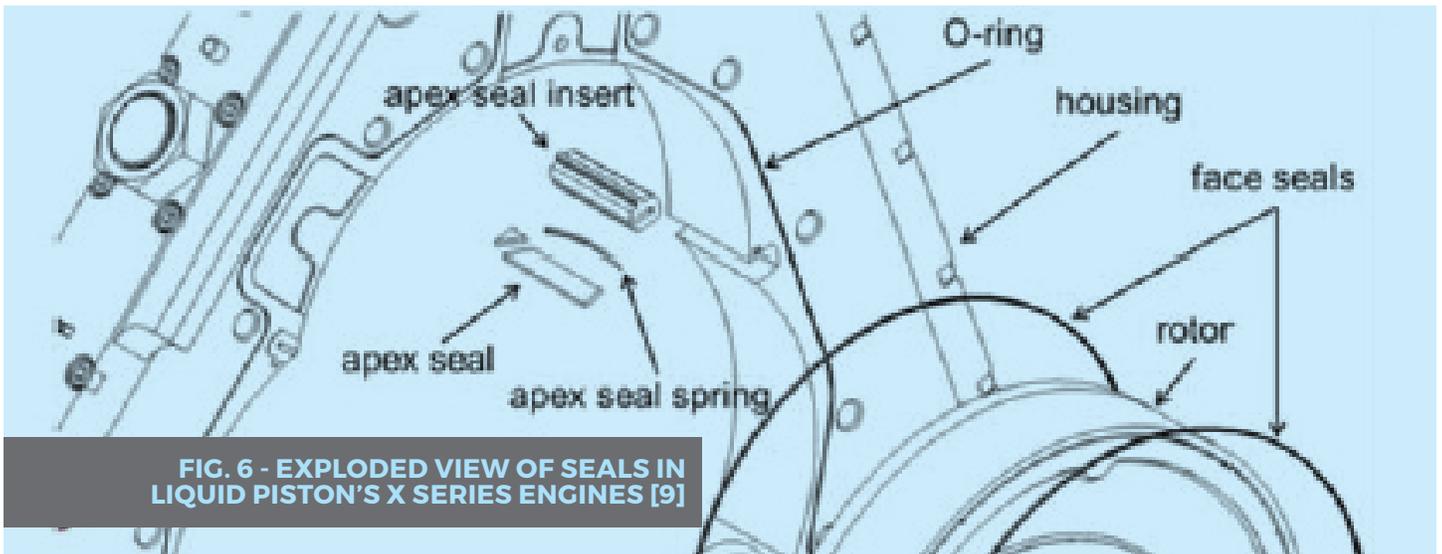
EXPLODED VIEW OF SEALS IN LIQUID PISTON'S X SERIES ENGINES [9]
